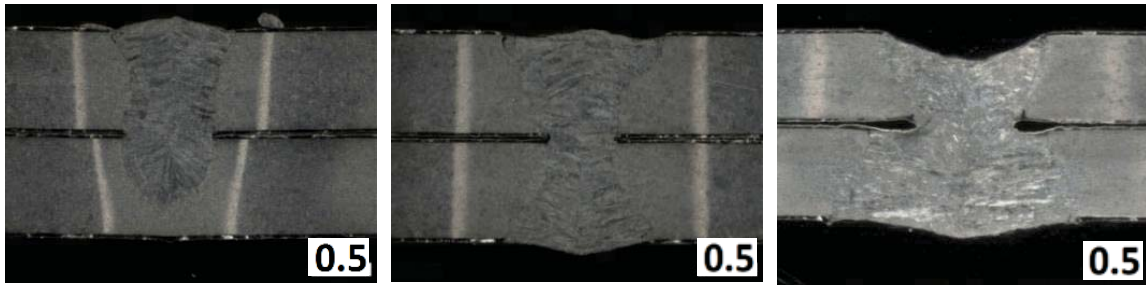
Cross-sections of MBW 1500 welded with 7.5 m/min (left), 3.5 m/min (middle) and 1.5 m/min (right) welding speed. The scale (0.5) is in mm.
